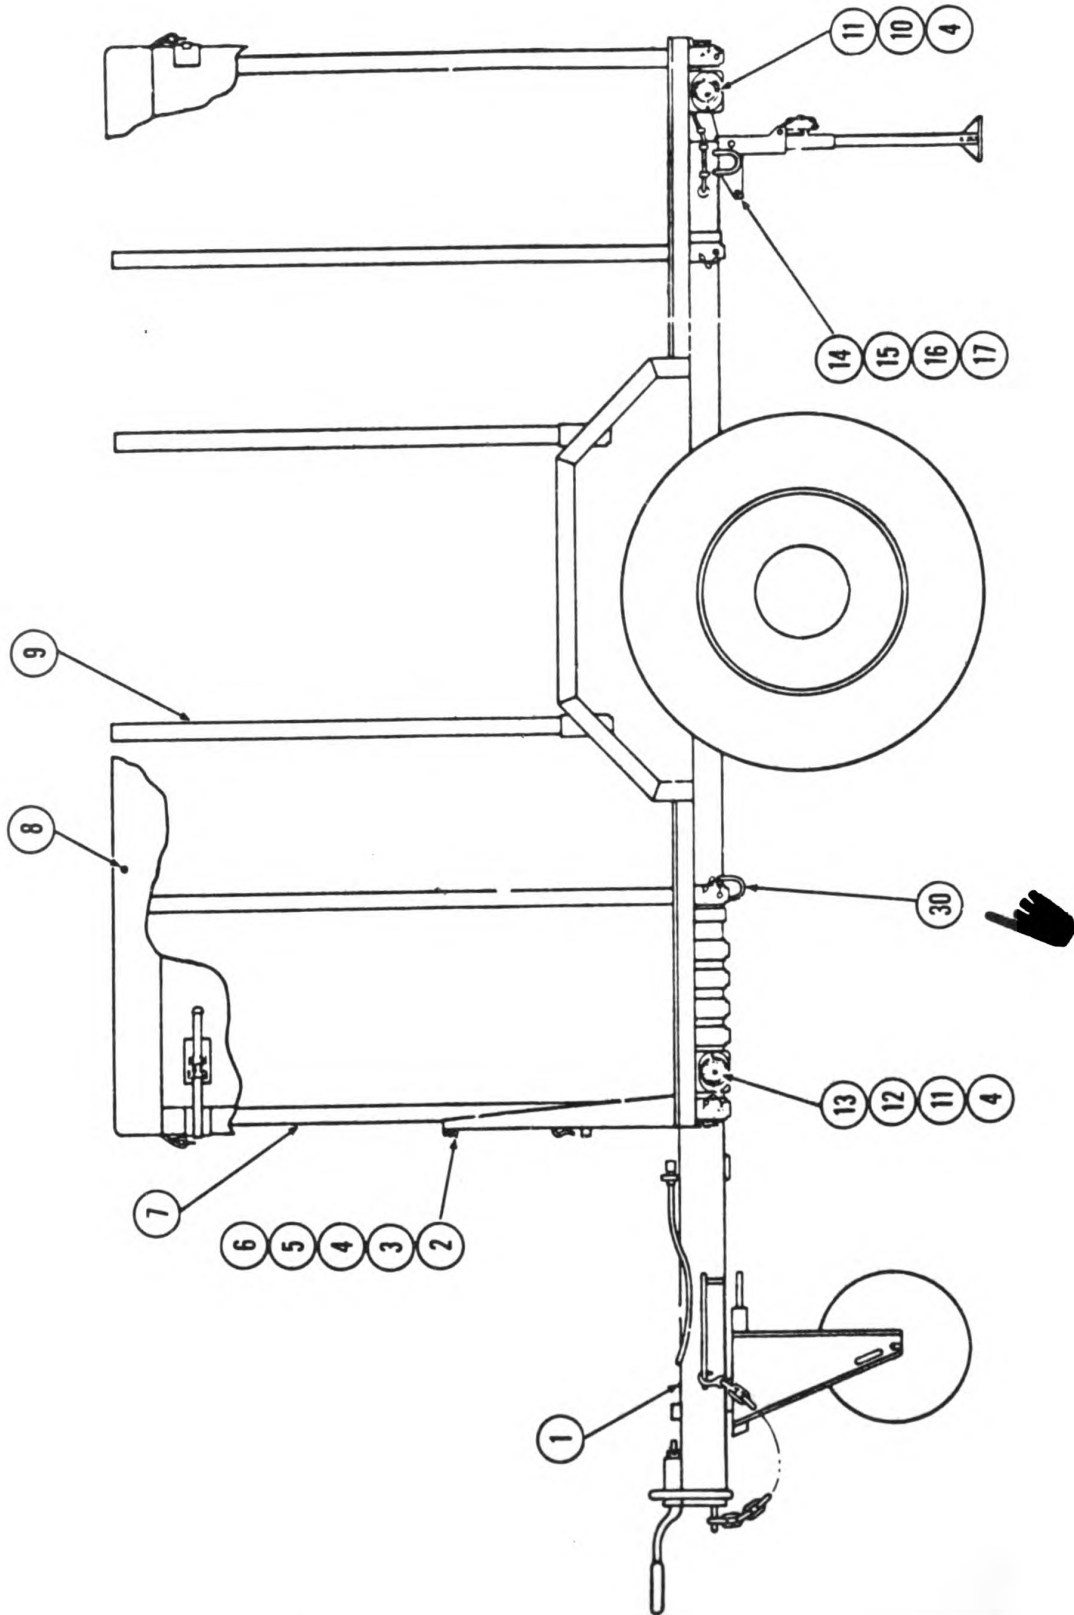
Trailer, Side, Top and Rear Views (Sheet 1 of 3)
